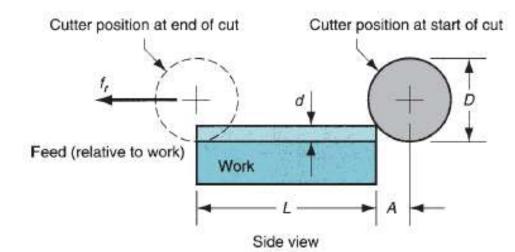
Slab (peripheral) milling showing entry of cutter into the workpiece.
